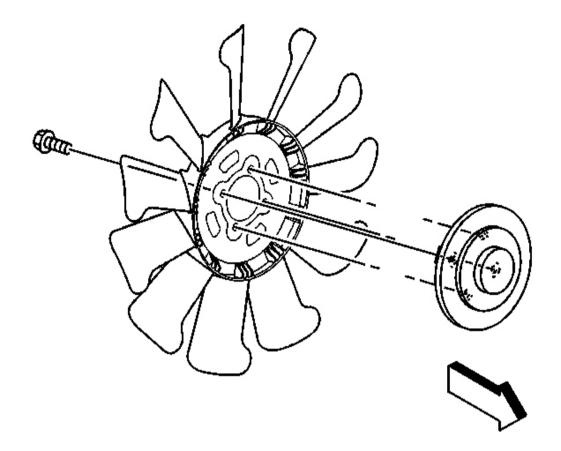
Fan Clutch & Fan Blade Courtesy of GENERAL MOTORS CORP.
